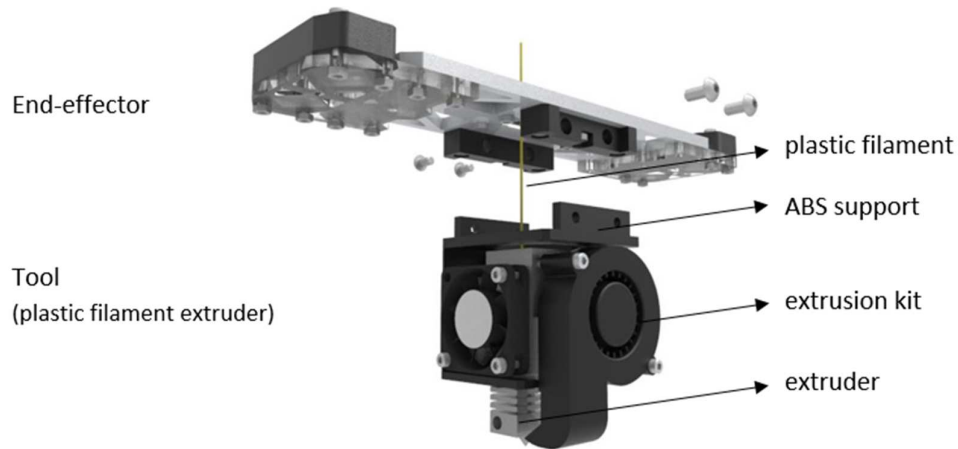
Exploded view of the SCALA manipulator end-effector with the unibody extrusion kit.
